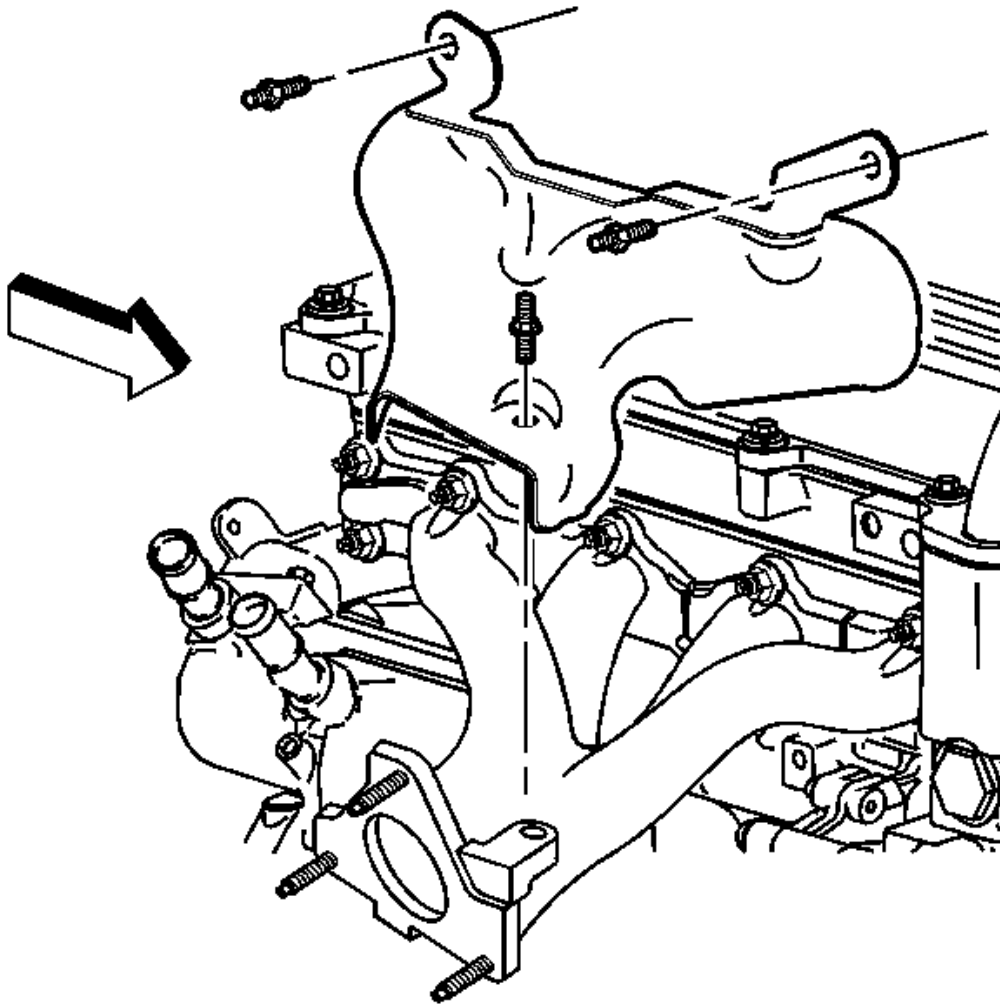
Removing & Installing Exhaust Manifold Heat Shield
